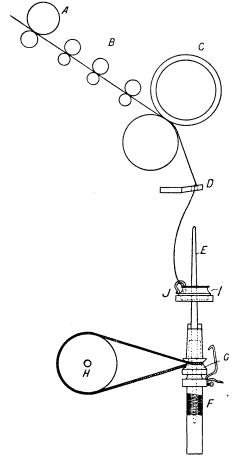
Ring Spring Frame.—A, back rollers; B, carriers; C, front rollers; D, eyelet board; E, spindle; F, spindle support; G, spindle wharl; H, tin drum round which spindle band passes; I, ring; J, traveller.
